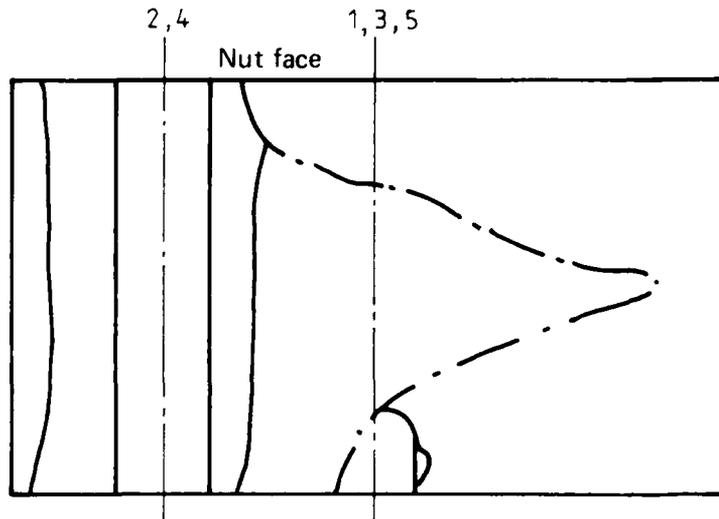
(b) FRACTURE SURFACES: SPECIMENS TYPE (C)
